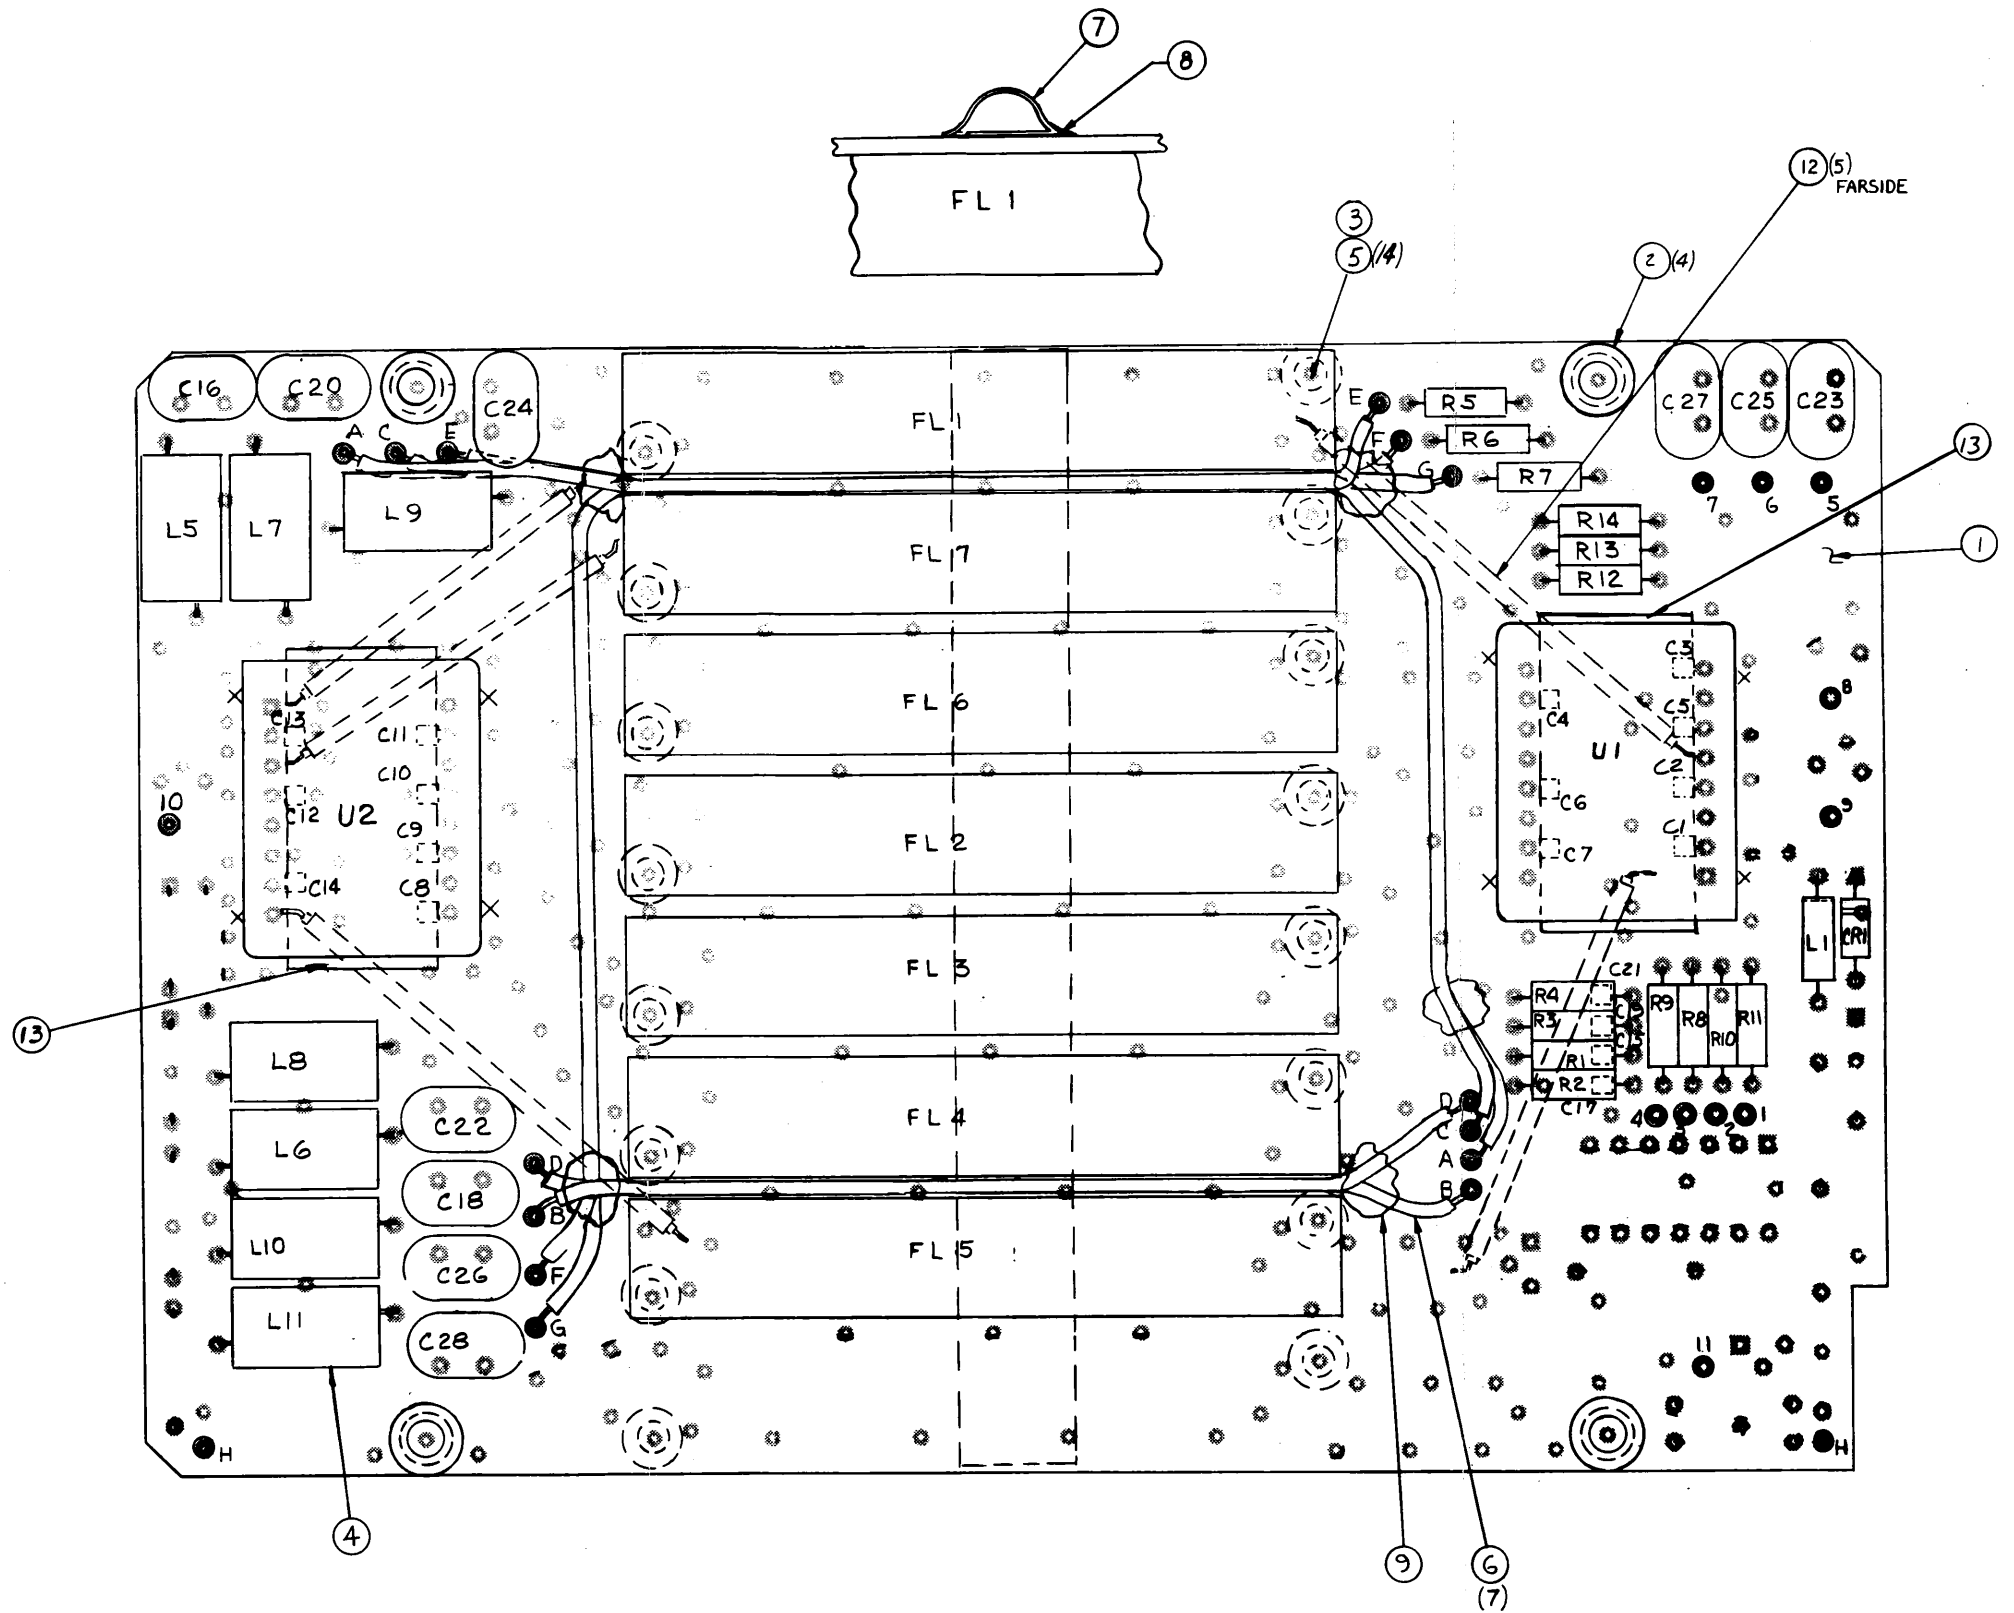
Receiver Circuit Card 1A5A2 Parts Location (Sheet 1 of 2)
